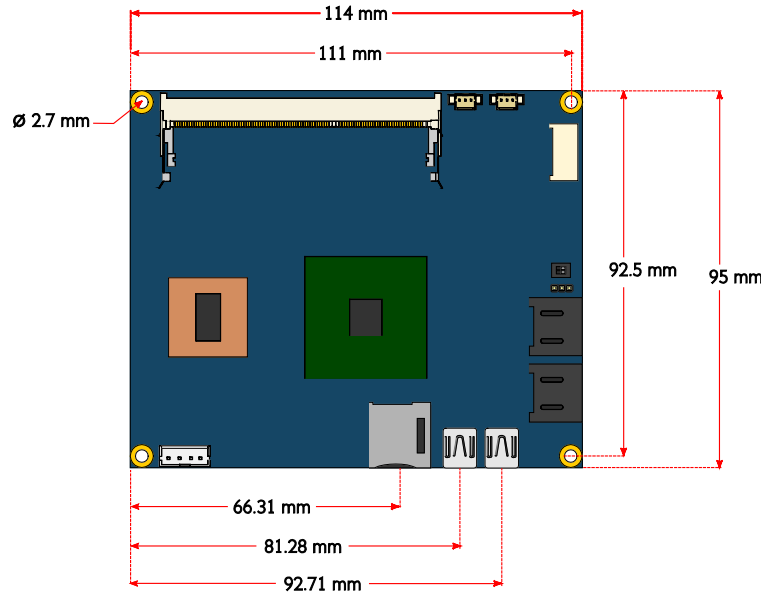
Dimensions of the VIA ETX-8X90 module (top view)
